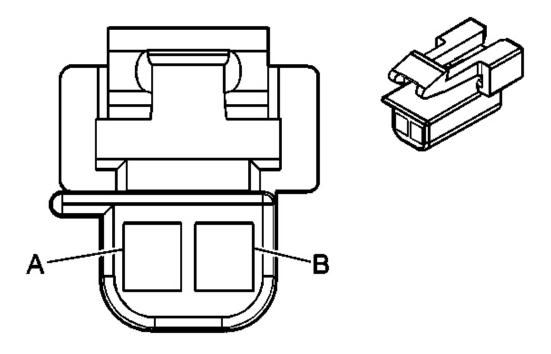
Speaker - Left Rear Door (UQA) Connector End View Courtesy of GENERAL MOTORS CORP.
